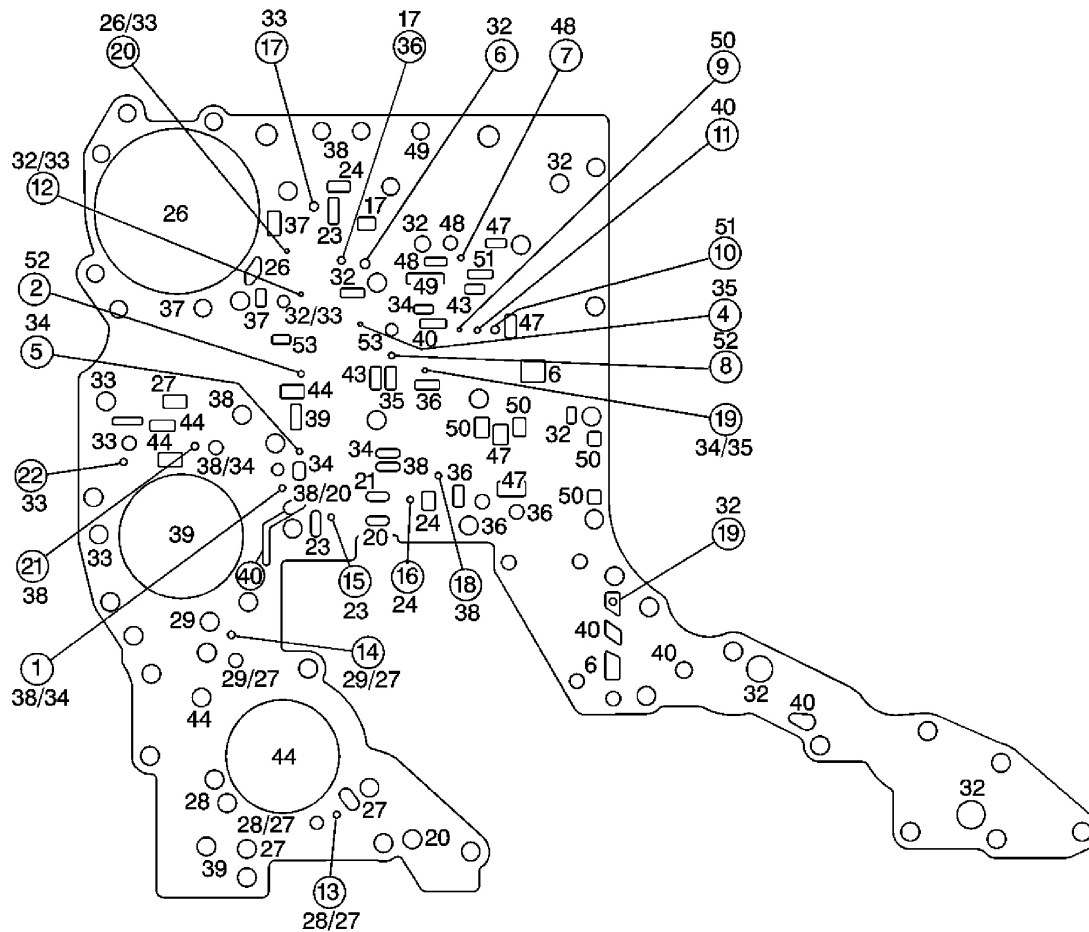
Spacer Plate and Gasket Assembly Fluid Passages (Lower Control Valve Body to Channel Plate)
